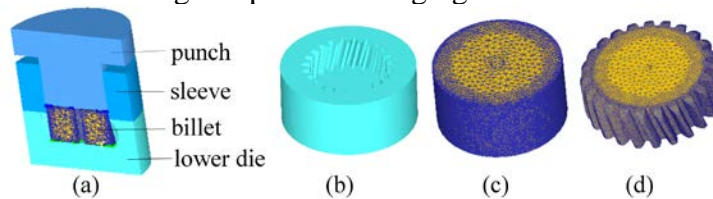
Three-dimensional FE model of cold precision forging of helical gear: a 3D FE model; b cavity; c initial billet; d deformed billet
